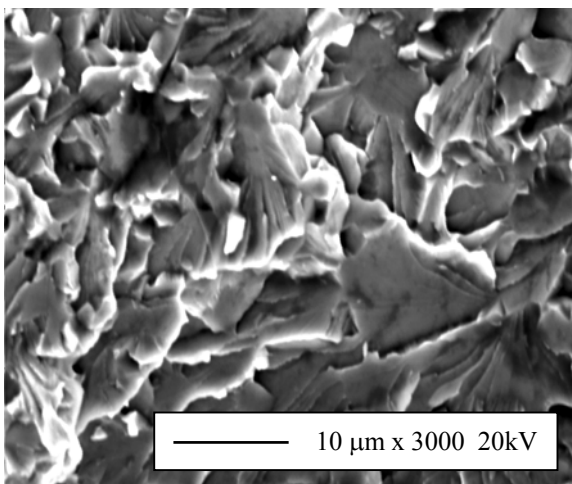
(c) Brittle facets on the fast fracture surface
